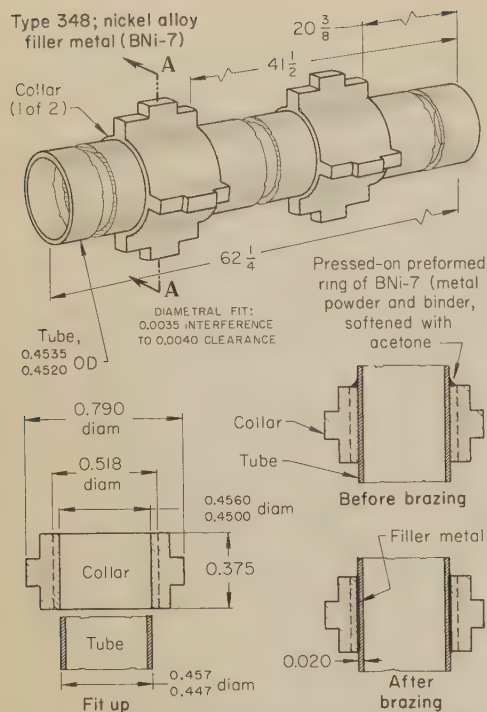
Collar-and-tube assembly that was induction brazed in vacuum (see text)
